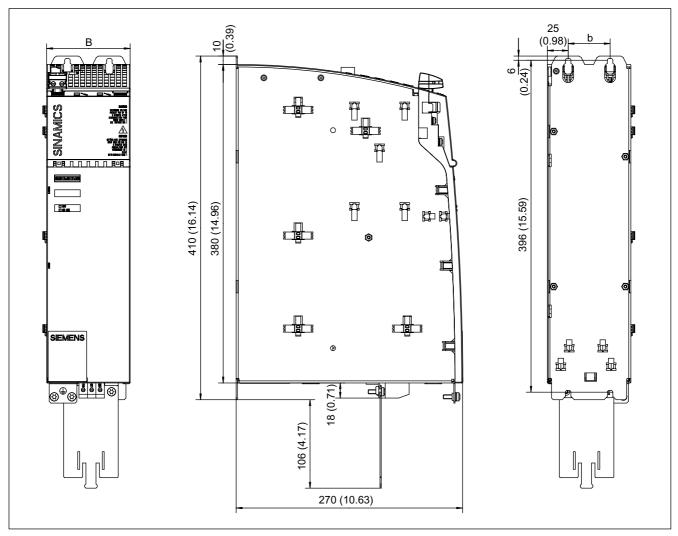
Dimension drawing of the Smart Line Module (16 kW) with internal air cooling
